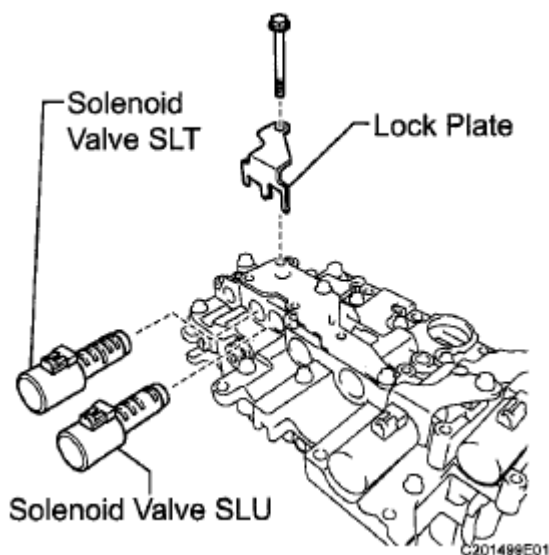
Identifying Solenoid Valve SLU, Lock Plate And Solenoid Valve SLT
